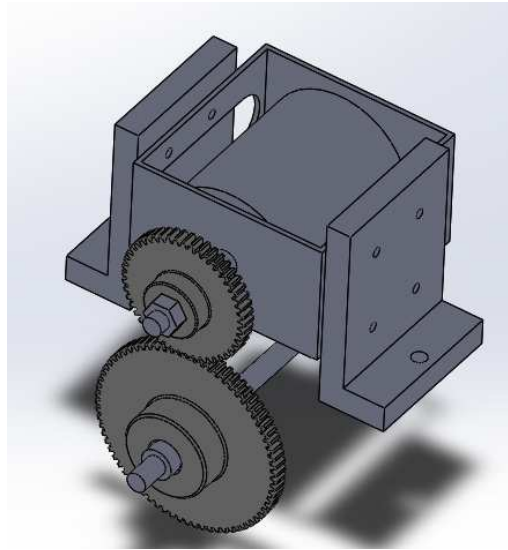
7: A CAD drawing of the quadcopter version I motor mount.
